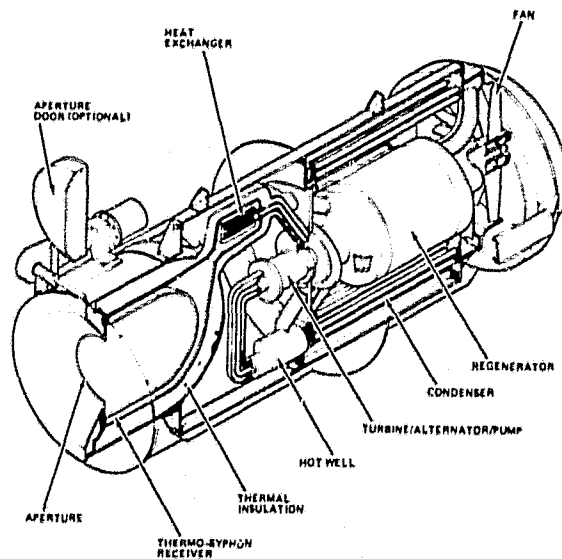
ORC POWER CONVERSION ASSEMBLY
